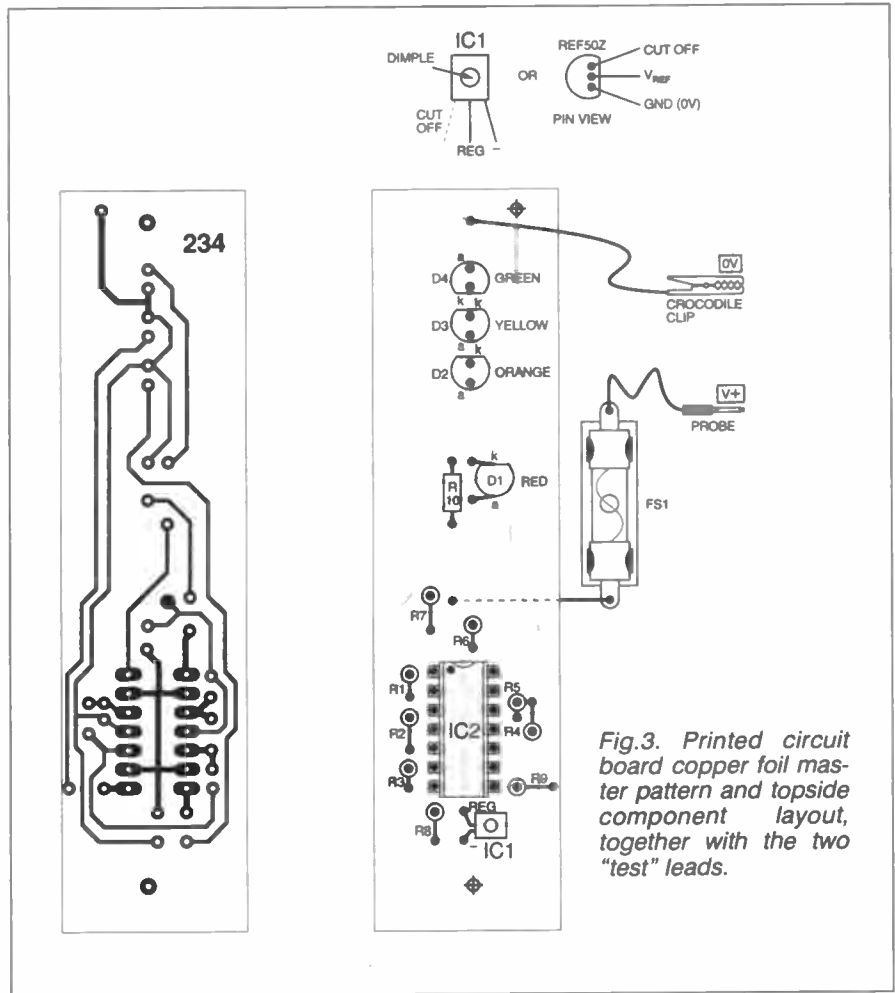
Printed circuit board copper foil master pattern and topside component layout, together with the two "test" leads.
